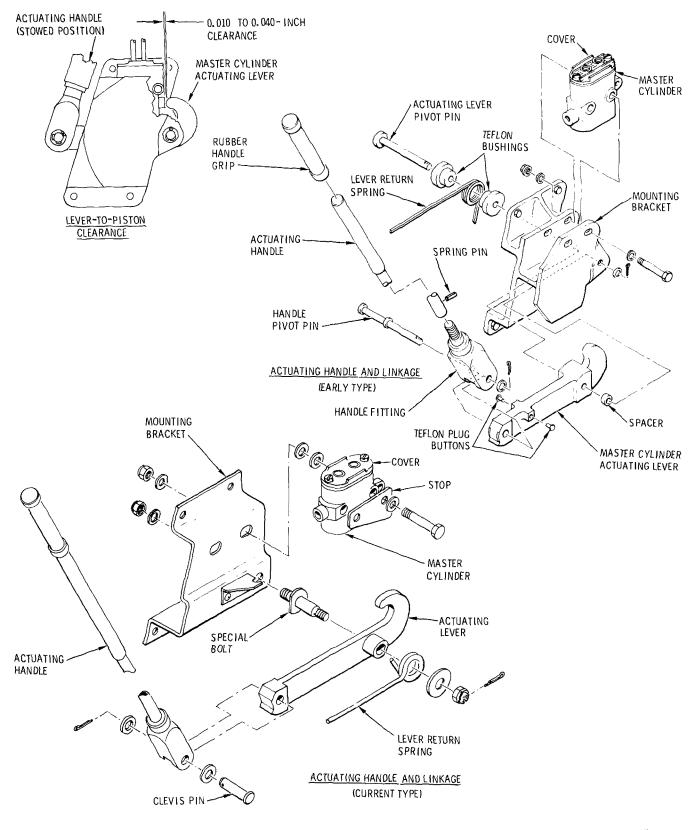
Rotor brake installation (sheet 1 of 3)
